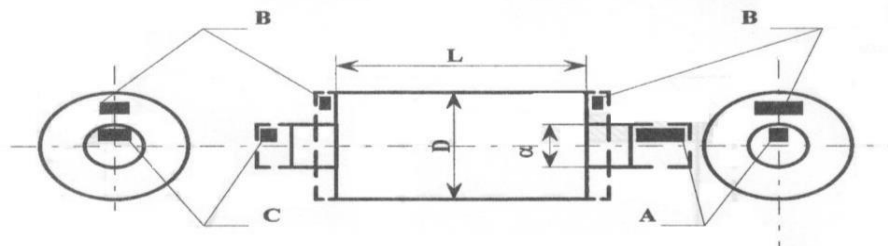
Sampling of gear wheel forgings and its number
